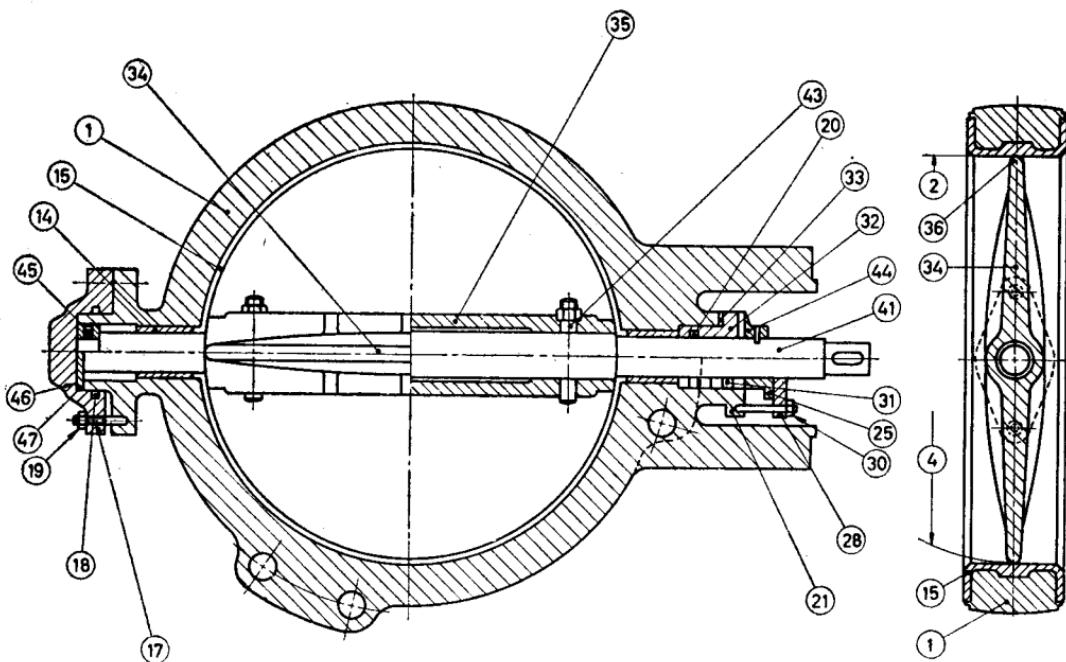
TYPICAL FLANGED TYPE BUTTERFLY VALVE
